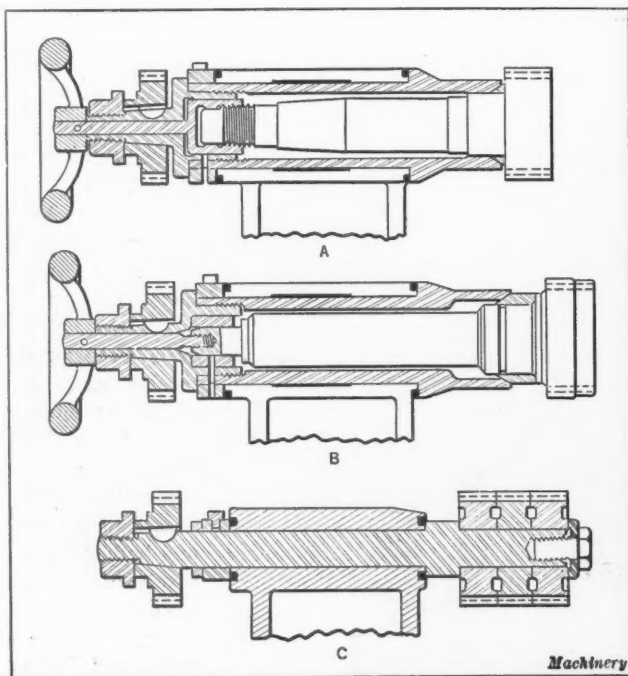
Methods of holding Work on Gear Grinder of Type shown in Figs. 7 and 8
